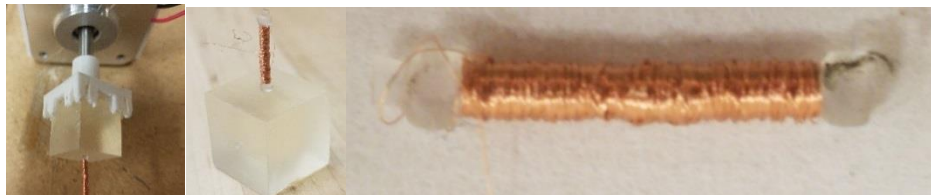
Coil being wound (left), coil winding completed (middle), version 1 transmitter coil (right).
